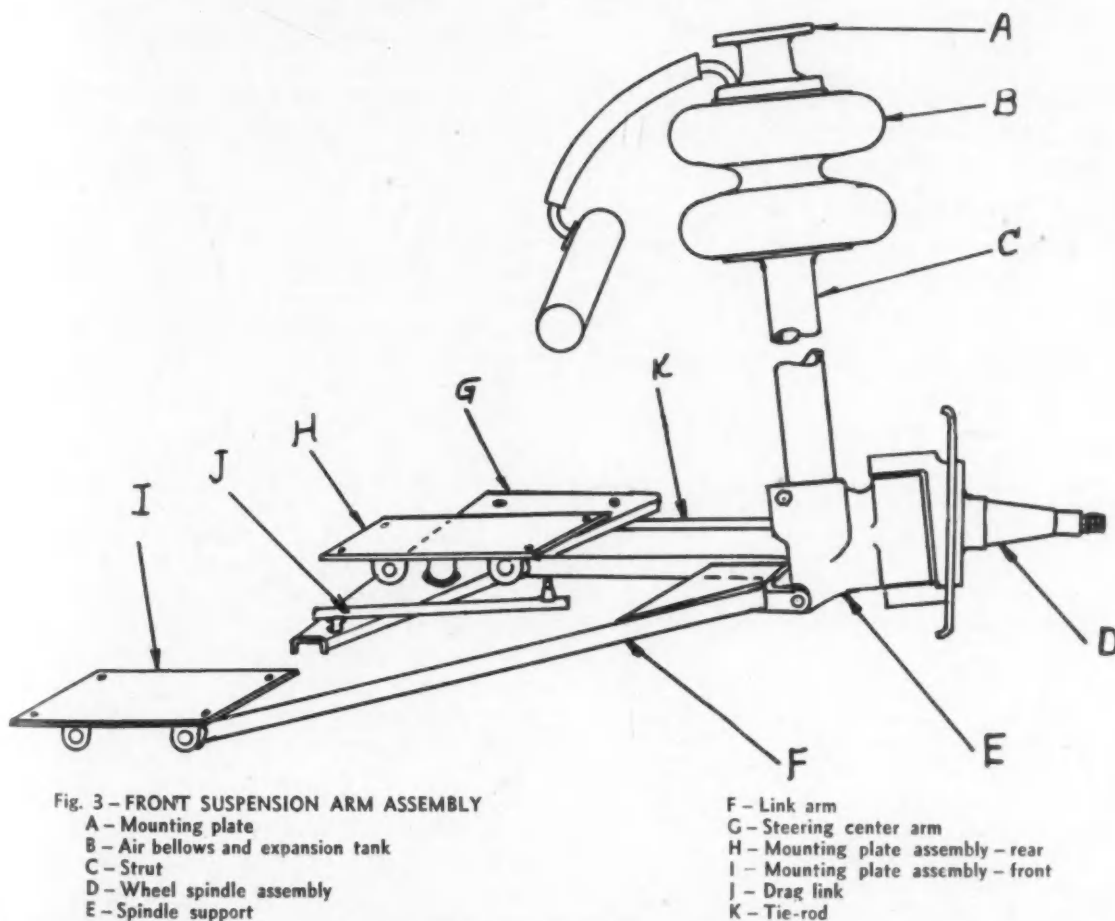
FRONT SUSPENSION ARM ASSEMBLY
